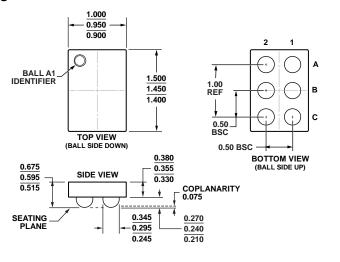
6-Ball Wafer Level Chip Scale Package [WLCSP] (CB-6-2) Dimensions shown in millimeters
